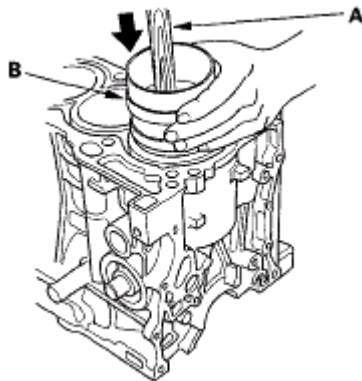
Positioning Piston/Connecting Rod Assembly In Cylinder
